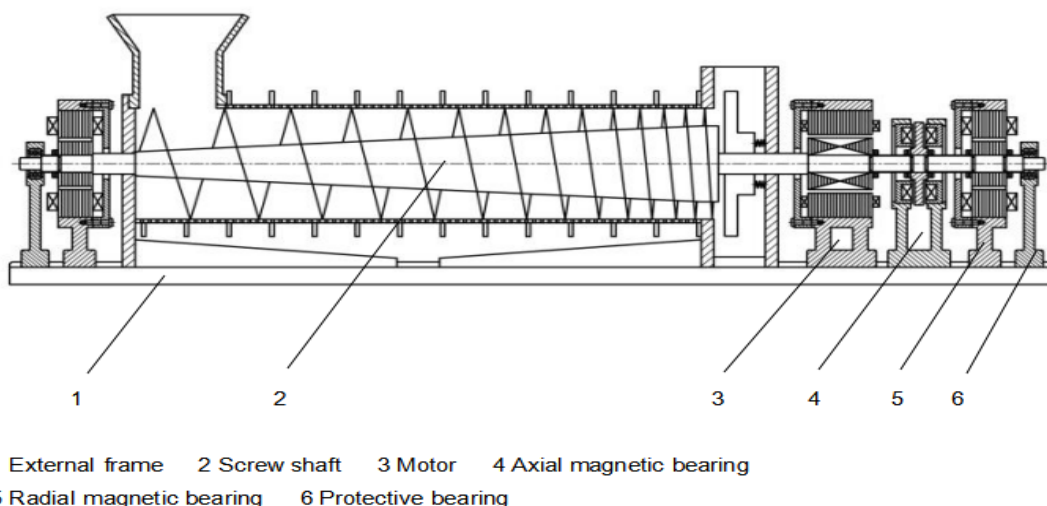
Schematic diagram of the supporting layout of the electromagnetic bearing system of the stacked screw machine
